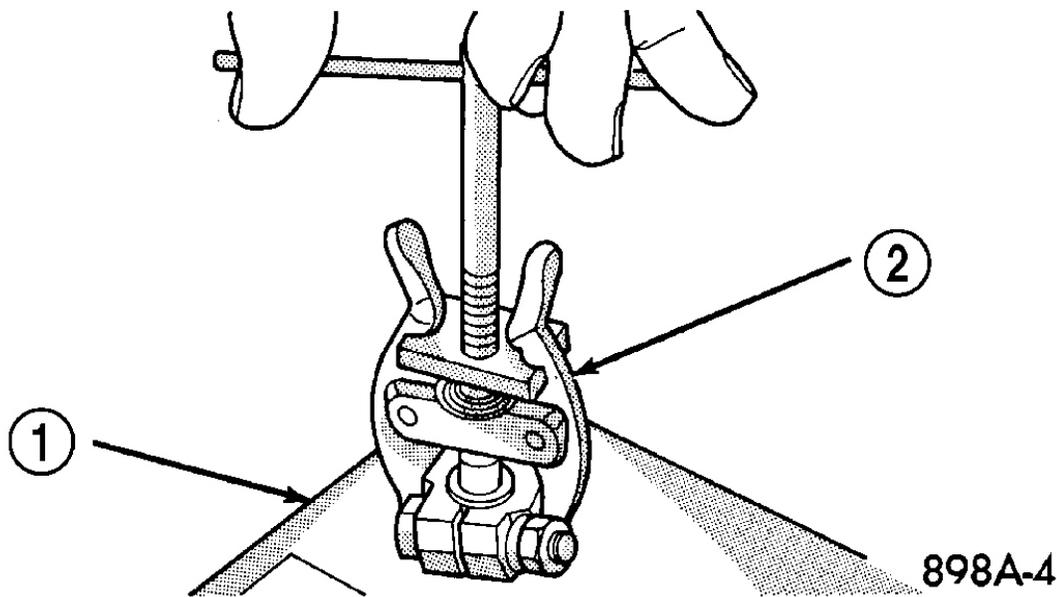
Using Battery Terminal Removal Tool To Disconnect Negative Battery Cable From Battery
